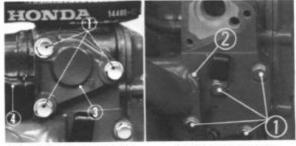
① 6 mm bolts ② Thermostat cover ② Intake manifold ② Water tubes
